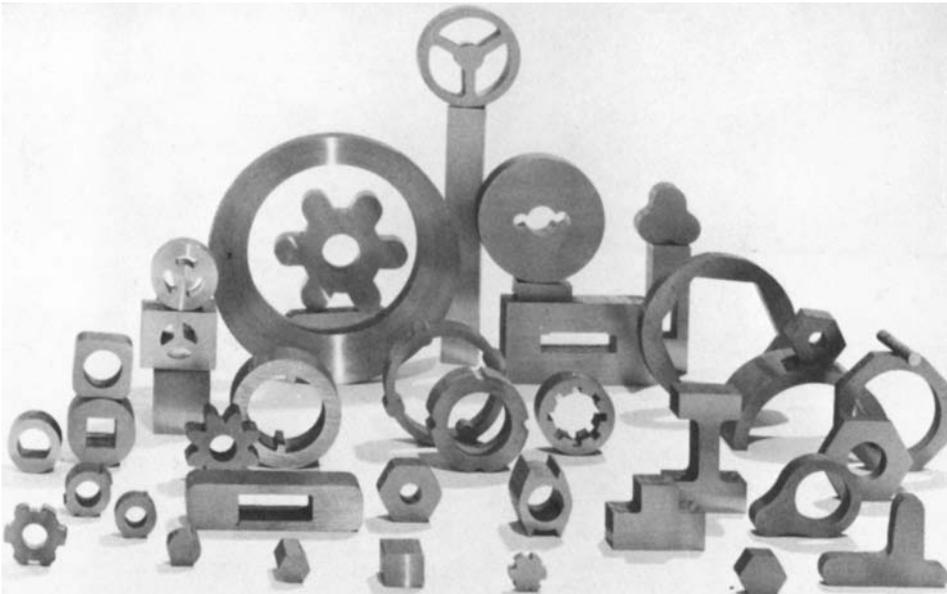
Variety of intricate shapes and sizes obtained using continuous casting methods to produce brass and bronze alloy parts
